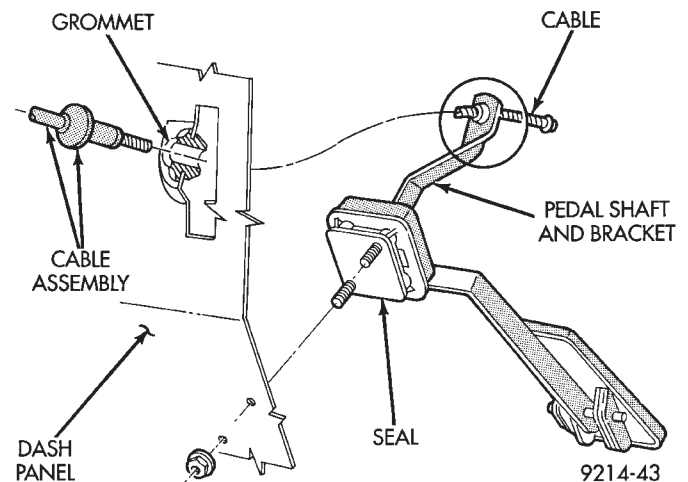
Accelerator Pedal and Throttle Cable—Front View
